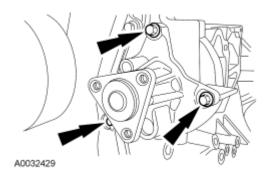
Locating Coolant Pump Bolts Courtesy of FORD MOTOR CO.
